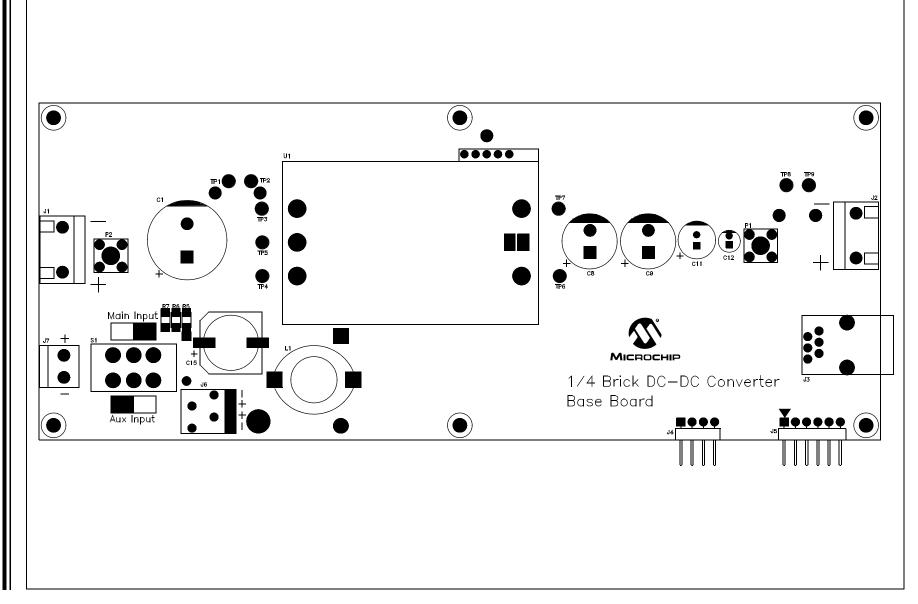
BASE BOARD LAYOUT (BOTTOM VIEW)
